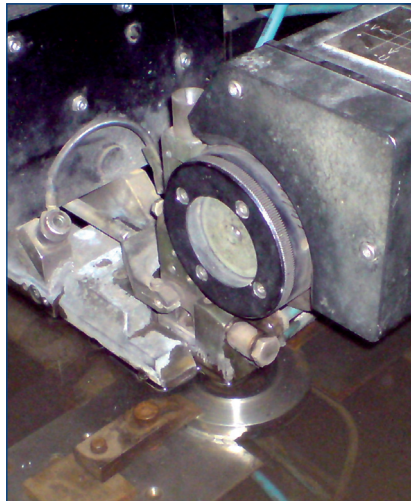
Cutting of the pulley using the wire electric discharge machining (EDM)
